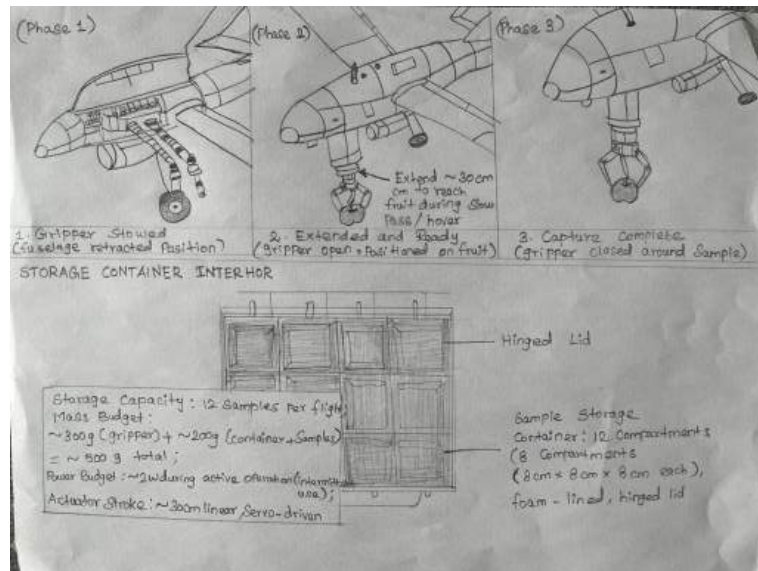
Preliminary Sample-Gathering Design showing gripper mechanism in three positions (stowed, extended-open, extended-closed) and 12-compartment storage container layout
